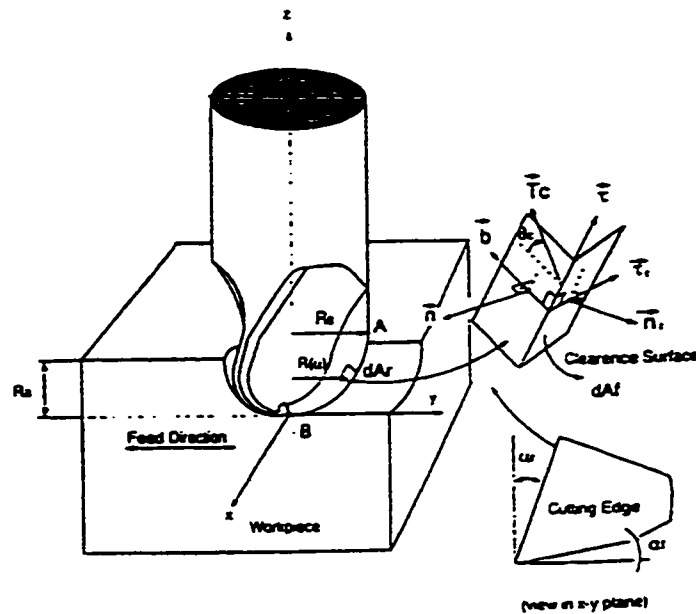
Geometry and Tool Coordinates for a Ball Mill Cutter [105]
